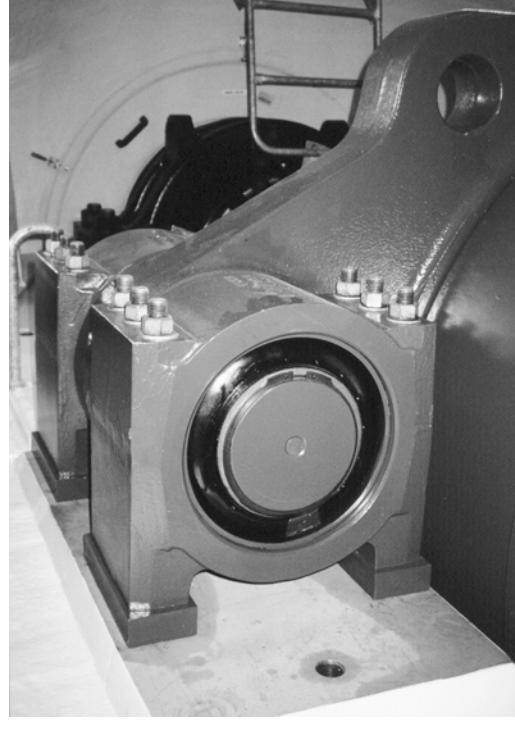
Elastic gearbox bearing in a GE TW 1.55
